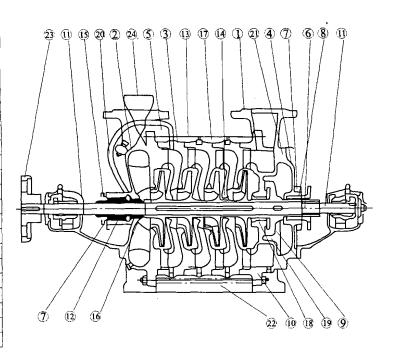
Construction of a horizontal shaft type multistage pump
